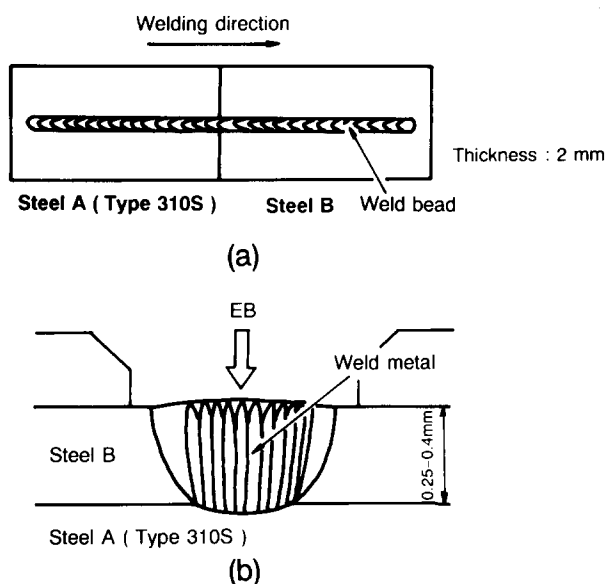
Electron beam welding of dissimilar stainless steels: (a) butt welding, (b) lap welding.
